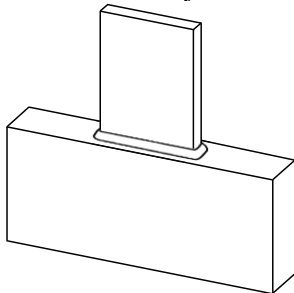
Types of Welded Joints and Corresponding Shell Models
